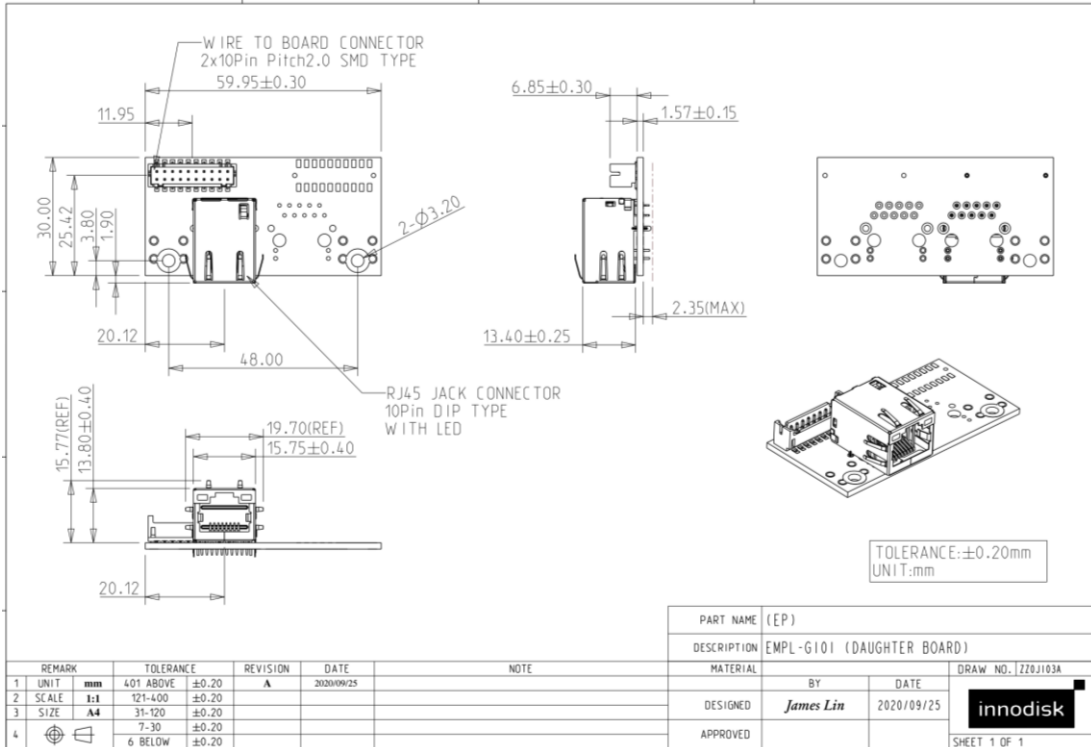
Bracket Daughter Board Drawing (EMPL-G101-C2/W2)
